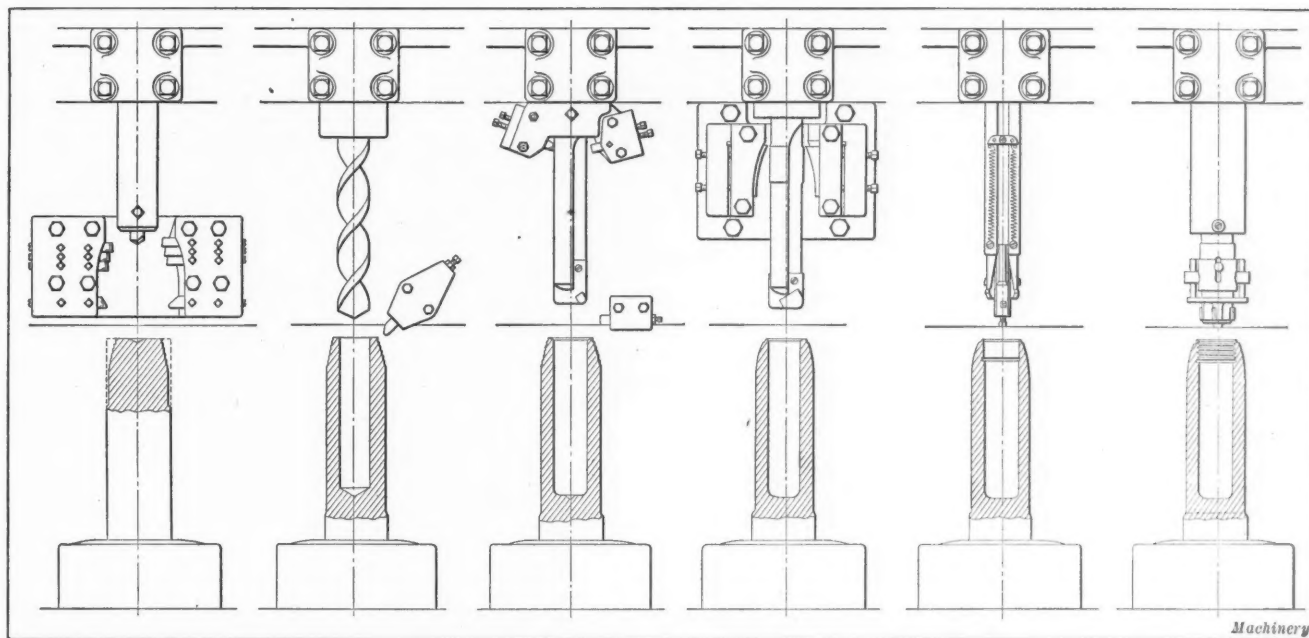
Tooling Layout for Six Operations in making a High-explosive Shell
